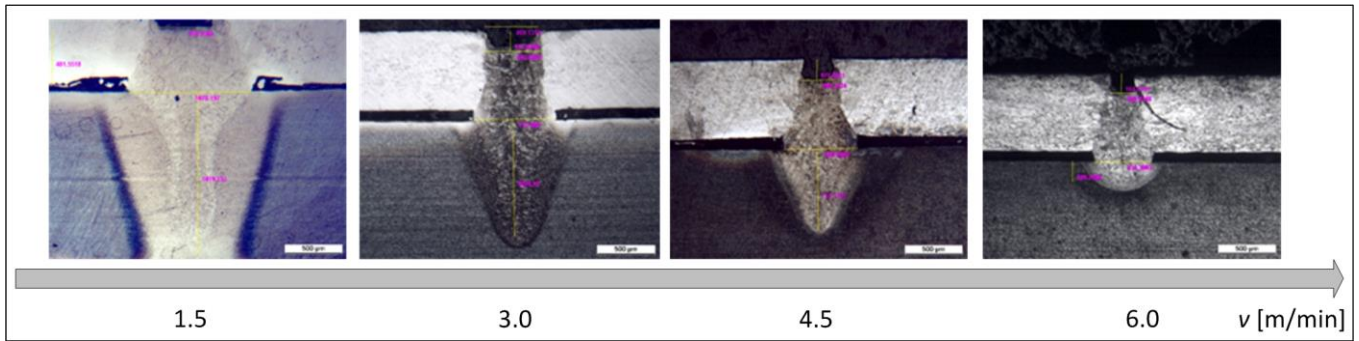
Representative cross sections of the tested remote laser welding conditions.
